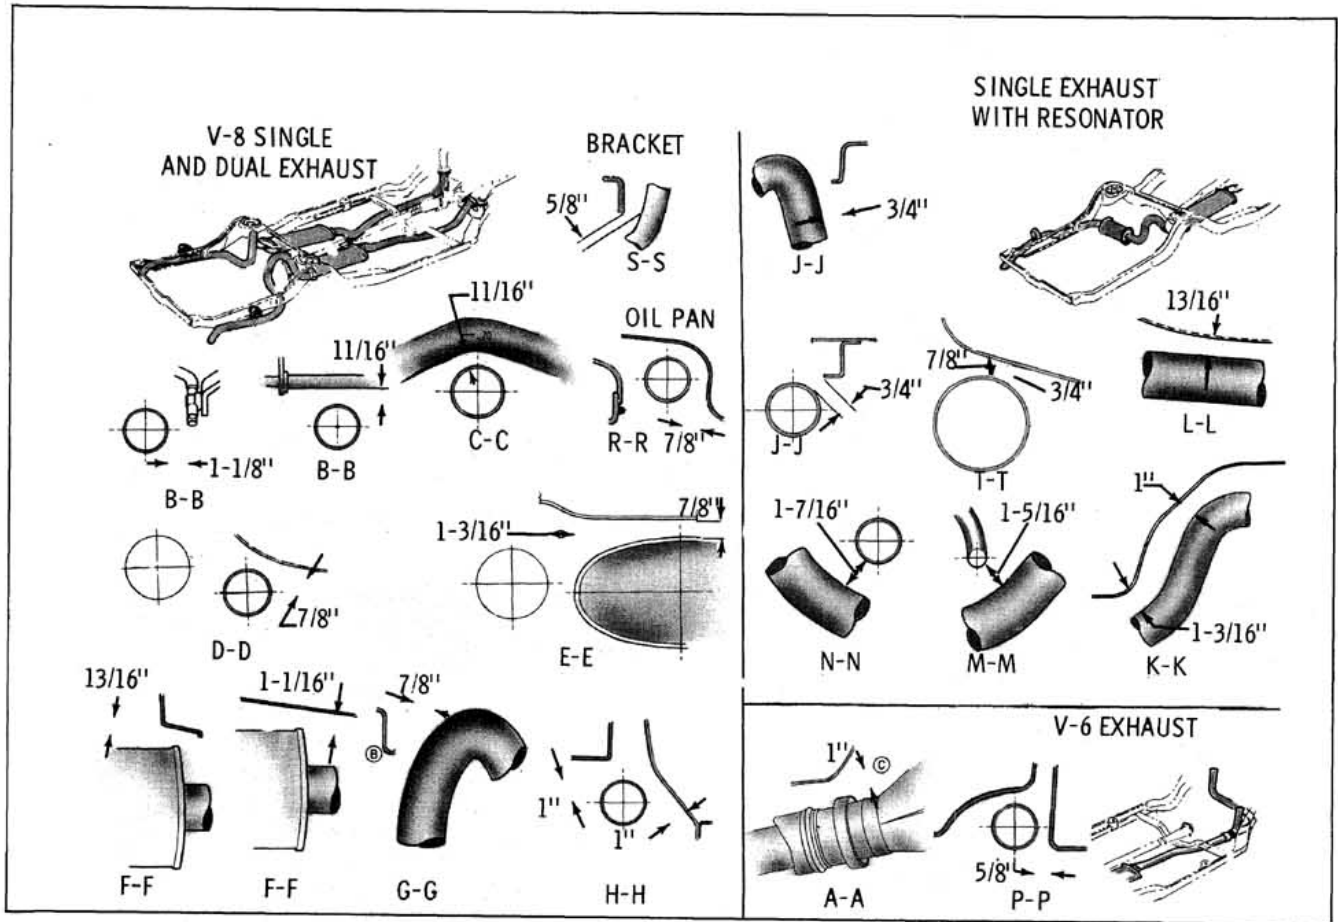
34-36 and 38 Series Exhaust Clearance
